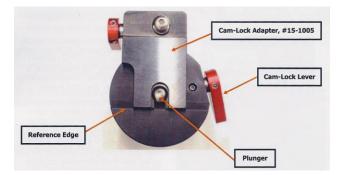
Bottom view of the Micro-Hub Assembly showing the reference edge.
